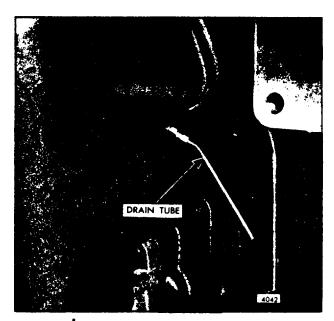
Air Box Drain Tube Mounting (6V Engine)
